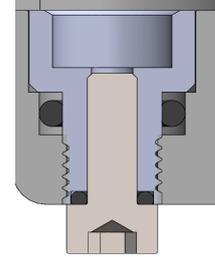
Section view of the new design for the valve seating with outer thread connected in a tapped hole in the cylinder head or foot.
